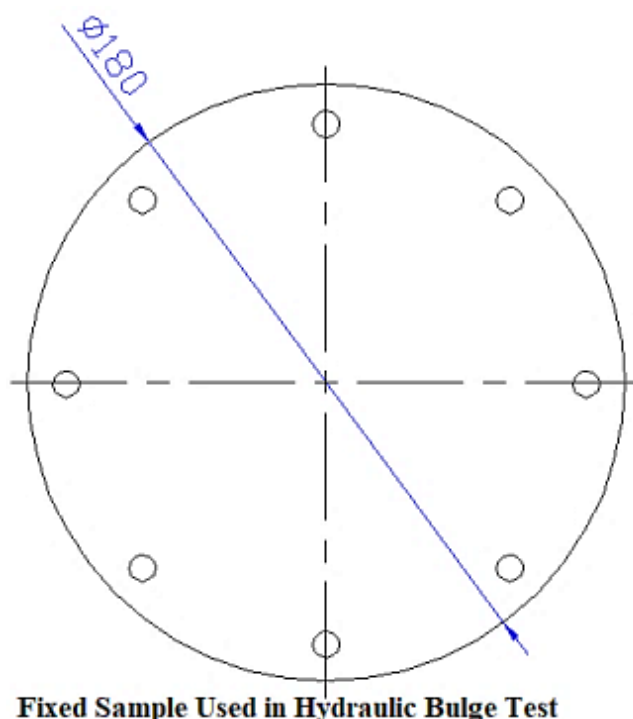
Fixed sample used in hydraulic bulge test (dimensions in mm).
